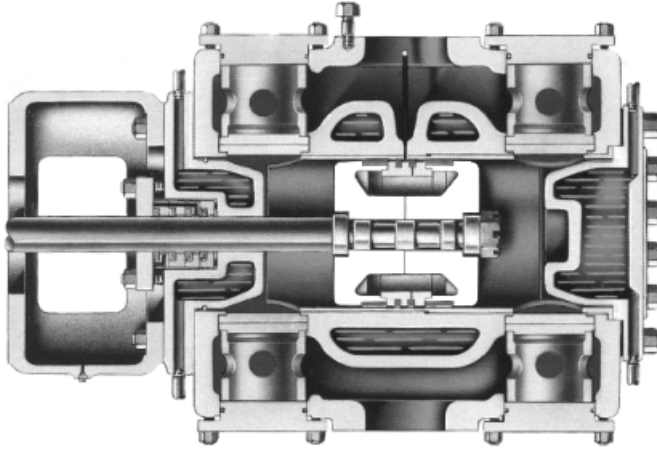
Low- or medium-pressure double-acting cylinder with a flanged liner and a three-piece piston. Liberally sized jackets reduce thermal stresses and aid in heat dissipation. (*Dresser-Rand Company, Painted Post, N.Y.*)
